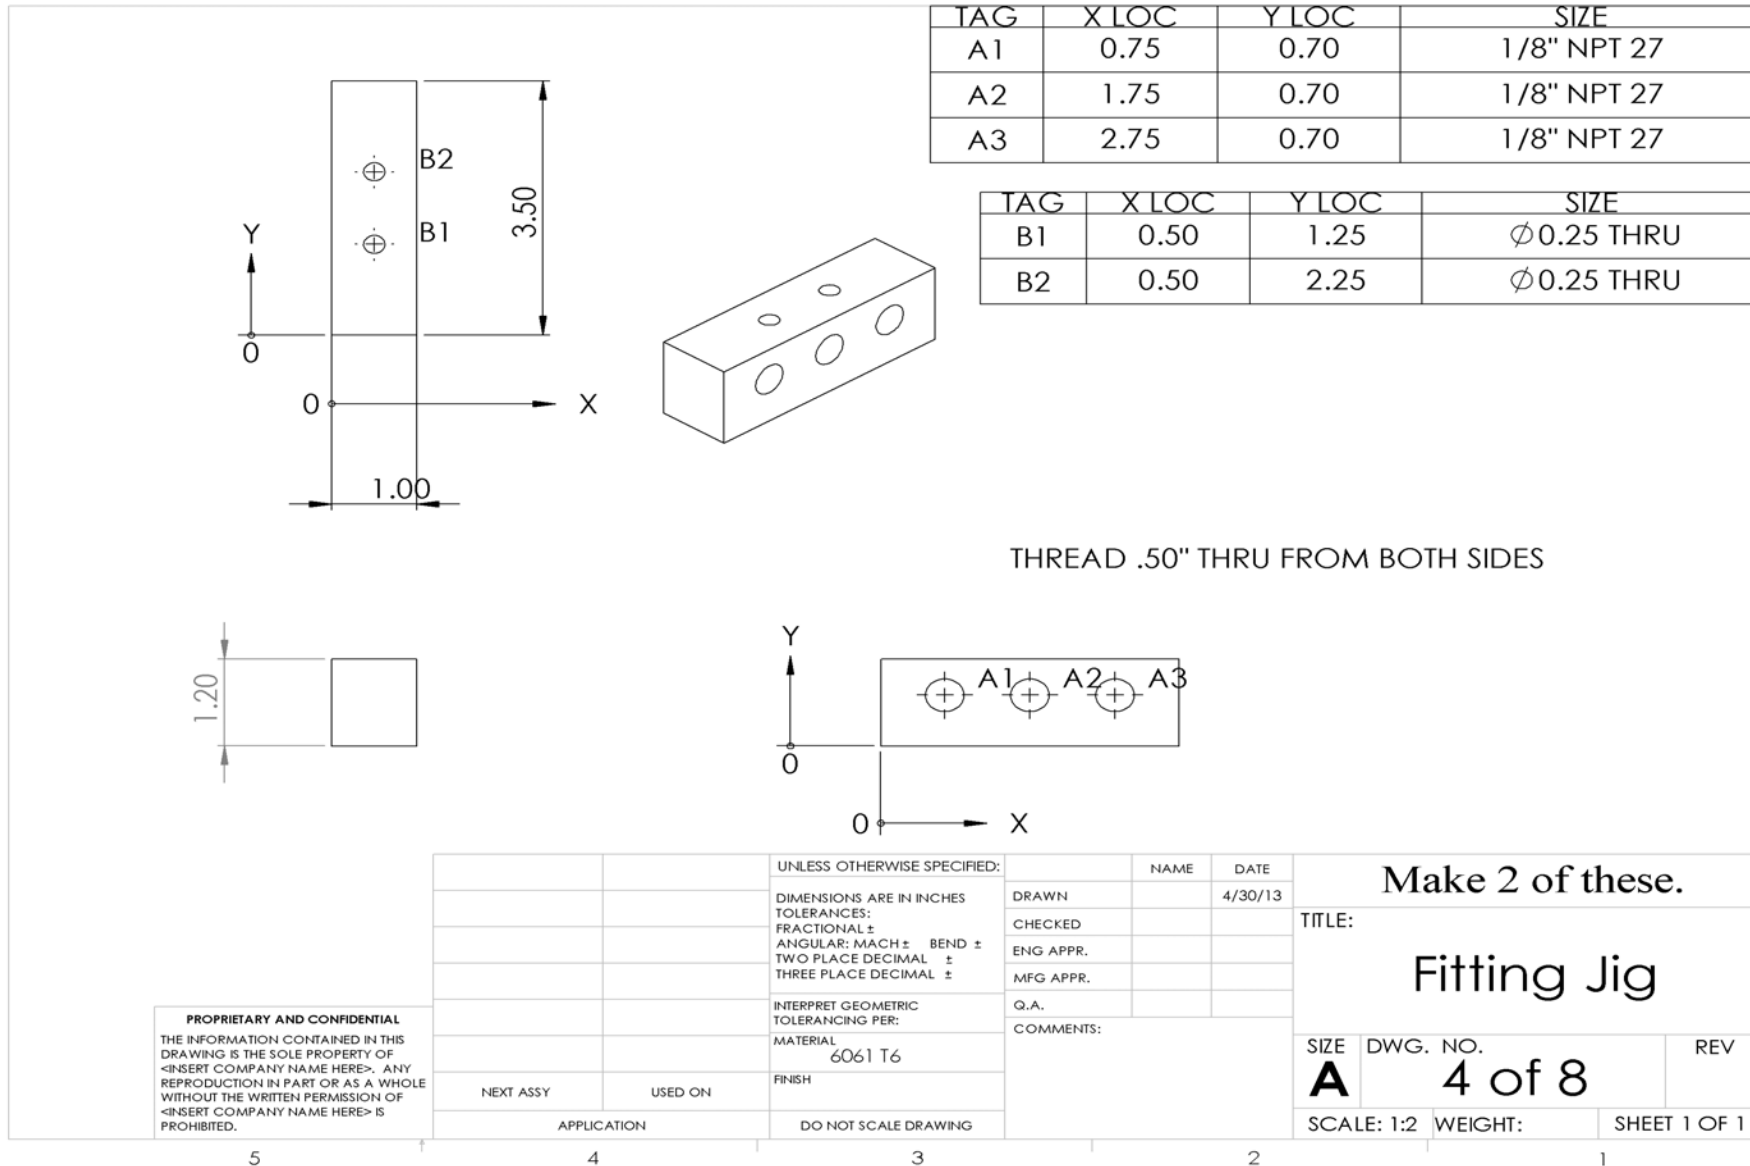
Fitting Jig*. This part will contain the tube fittings which will connect to the pump’s tubes and the outgoing and incoming tubes carrying the water as well. The tube fittings connect to holes A1 through A3, and B1 and B2 will be used to connect to the top and bottom Support Plates by using nuts and threaded rods. Two of these jigs have to be made, and one of them will contain a different sized hole in order to accommodate some spare tube fittings that we had to use in order to reduce costs.
